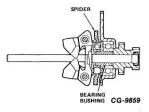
A — New Style "Resilient Drive" Governor Drive Shaft Assembly
